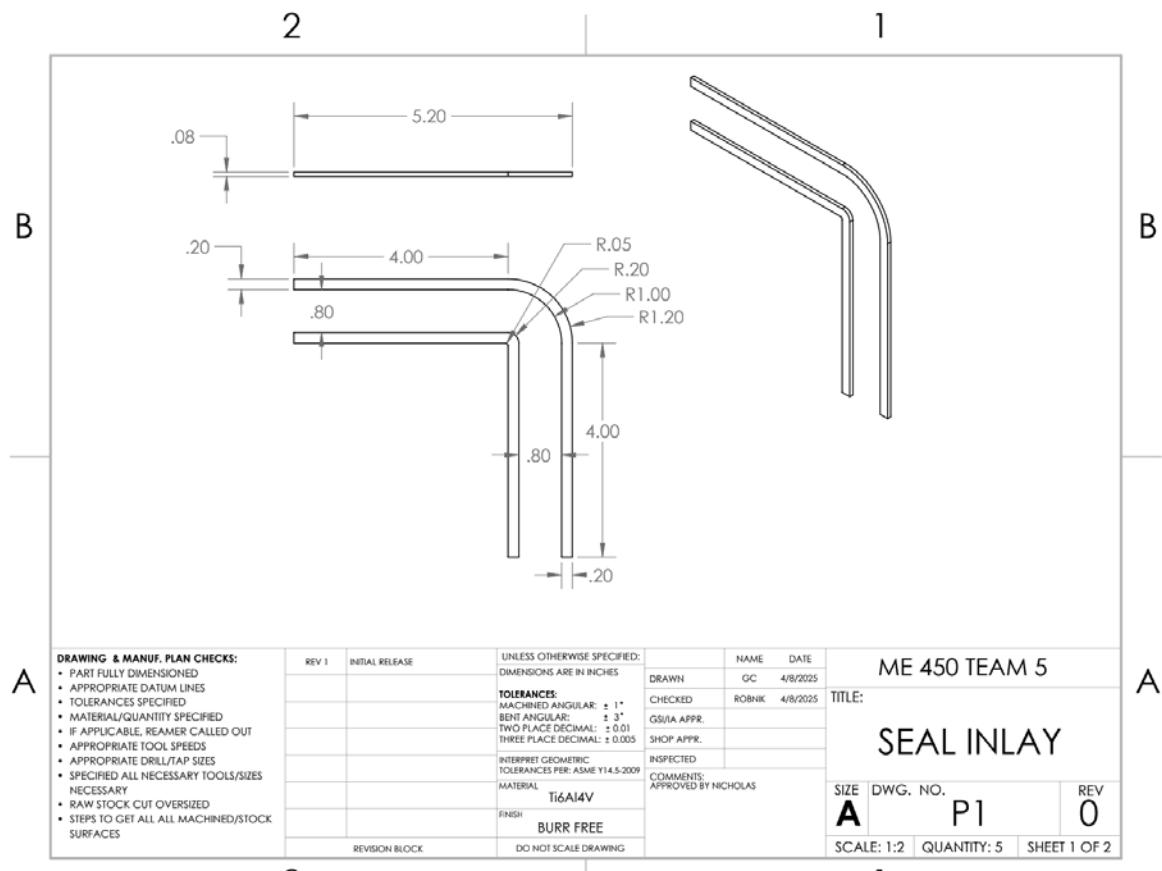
Manufacturing plan for the hatch frame groove and seal inlay.
